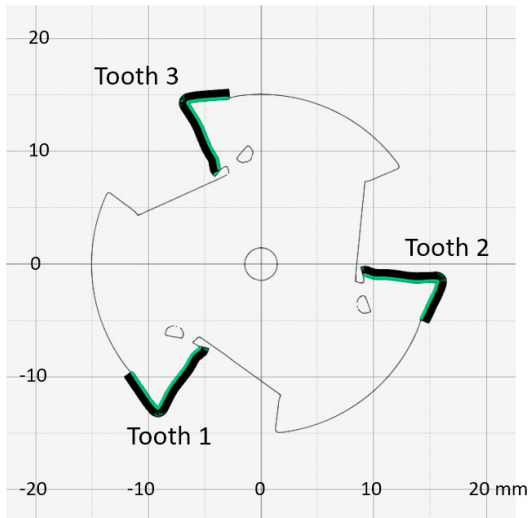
Rake and relief points on insert A of each tooth for the $z = -2$ mm section.
